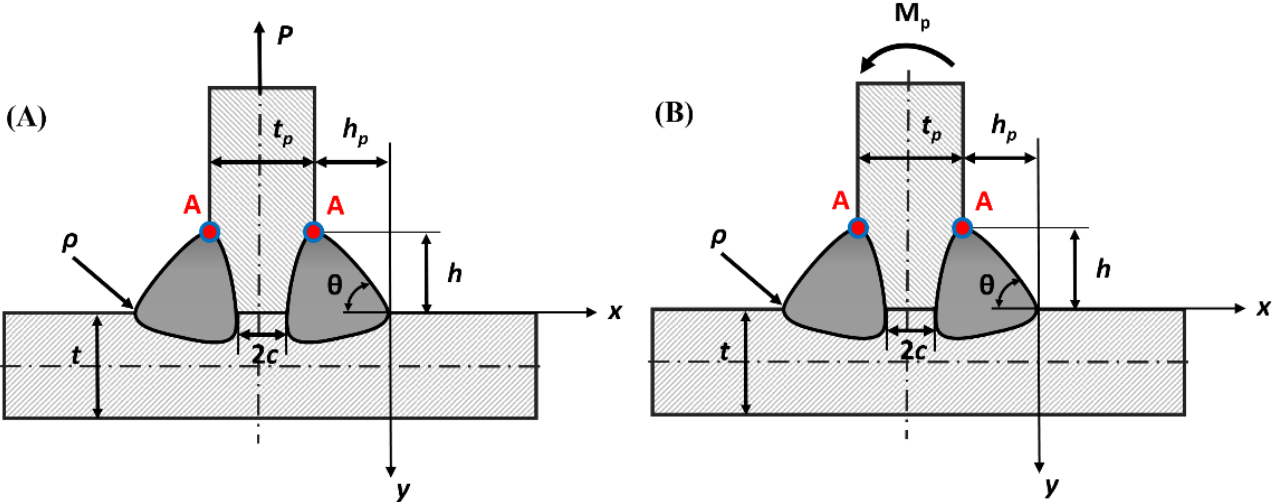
Terminology of a symmetric fillet weld in a T-joint attachment subjected to: A) Pure tension, and B) Pure bending loading [61]
